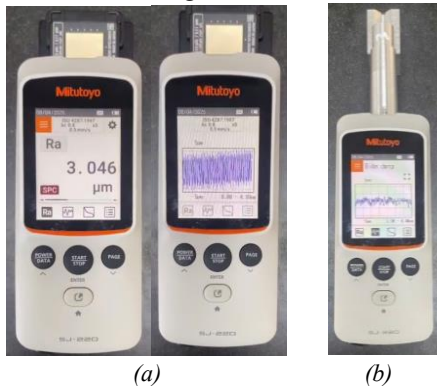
Calibration process of the surface roughness tester (a), workpiece setup for surface roughness measurement (b)
